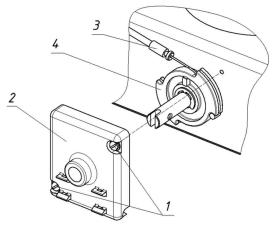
Release cable connection to the interlocking shaft of ISM15_HD_1
